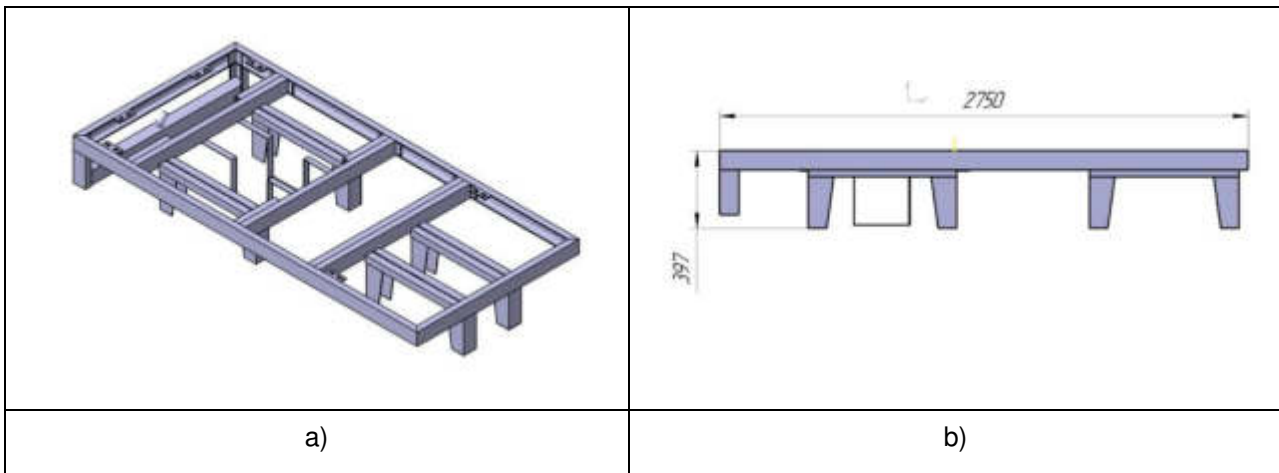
UMTET ladder load-bearing system a) geometric model b) overall dimensions
